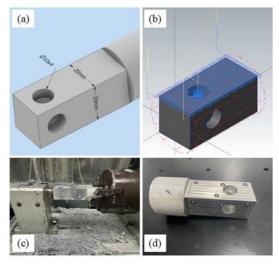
Sample machining and inspection process; a) CAD sample dimensions; b) Machining programming; c) Machining process; d) Inspection process
